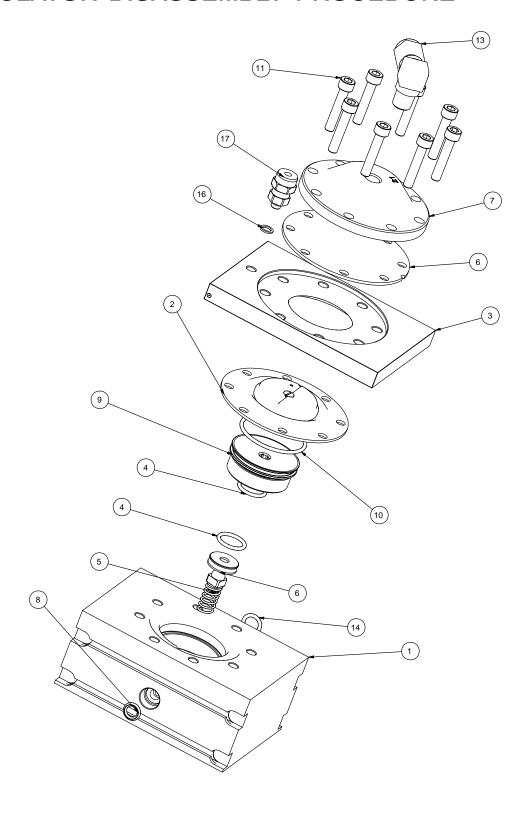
79239-XX Regulator Disassembly / Reassembly
